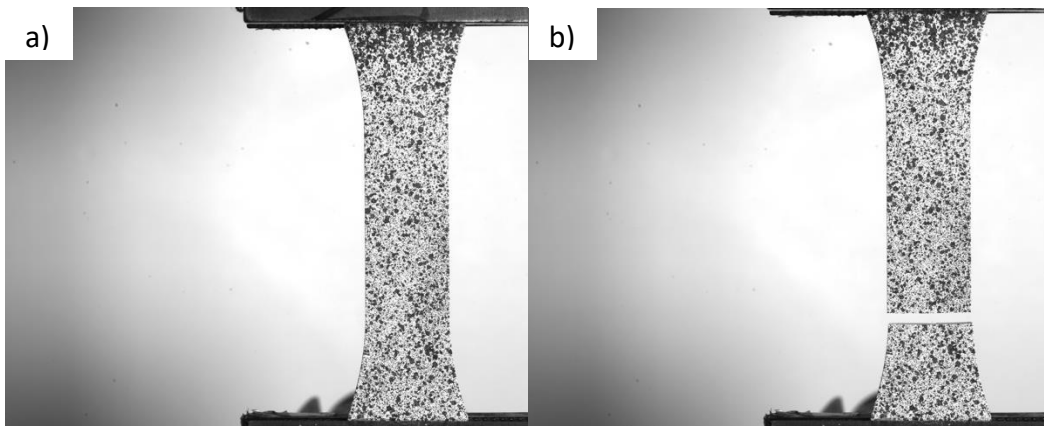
Specimen n.1 a) Before testing b) After fracture.
